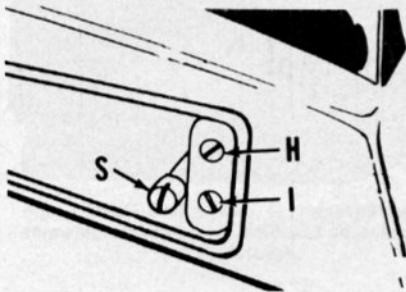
View showing location of carburetor high speed mixture screw (H), idle mixture screw (I) and idle speed screw (S).
